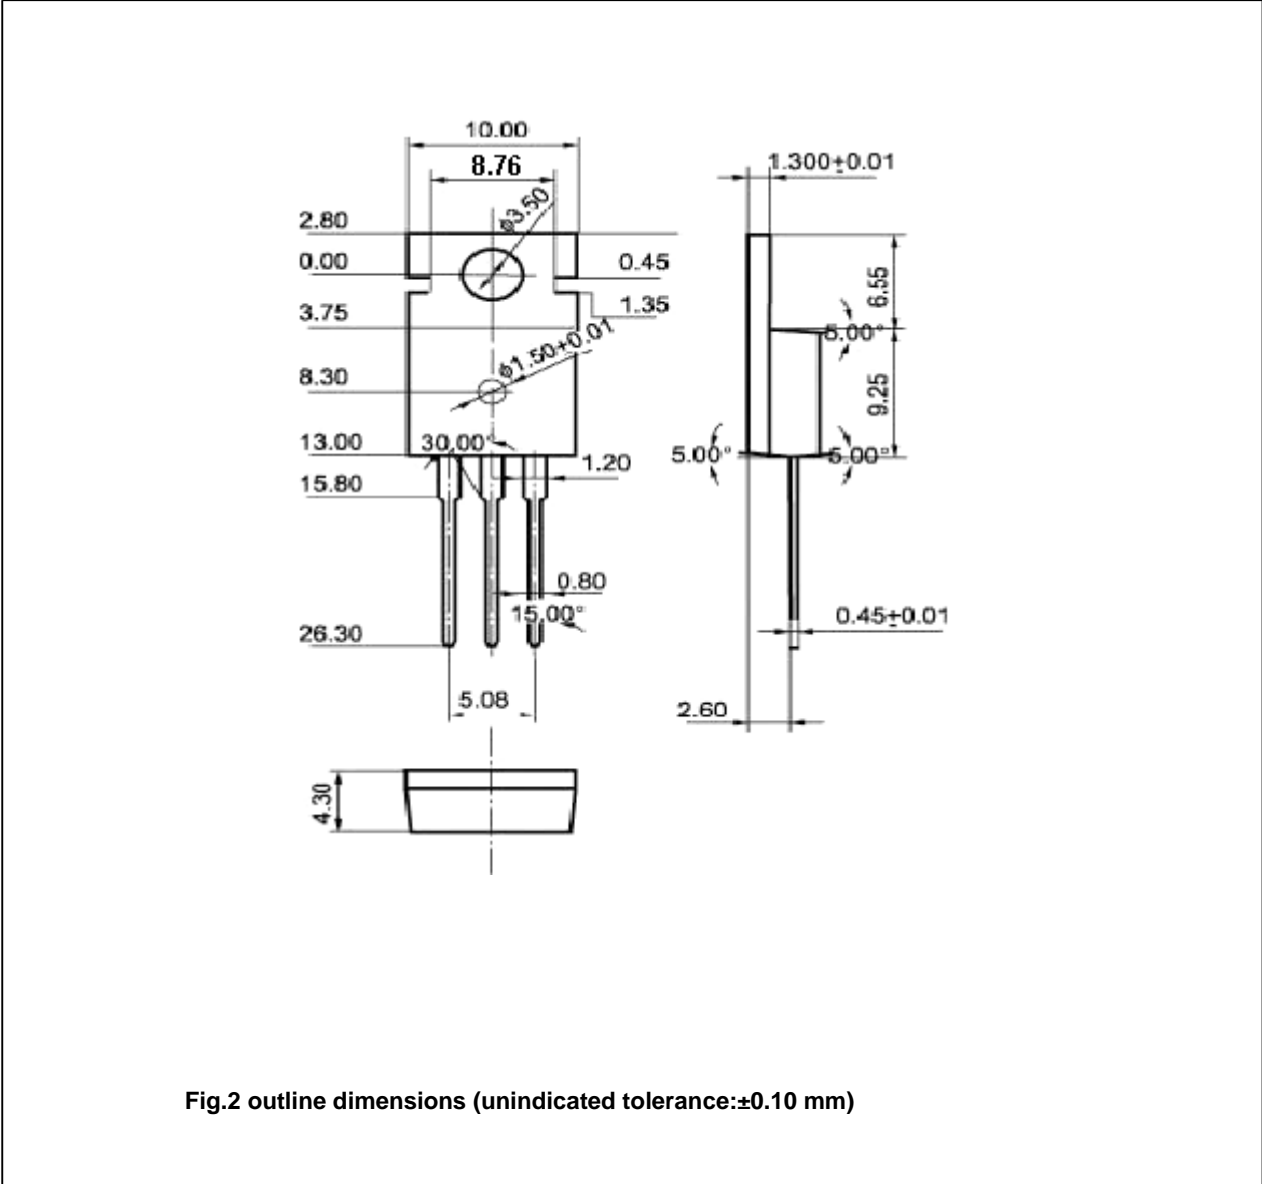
outline dimensions (unindicated tolerance:±0.10 mm)
